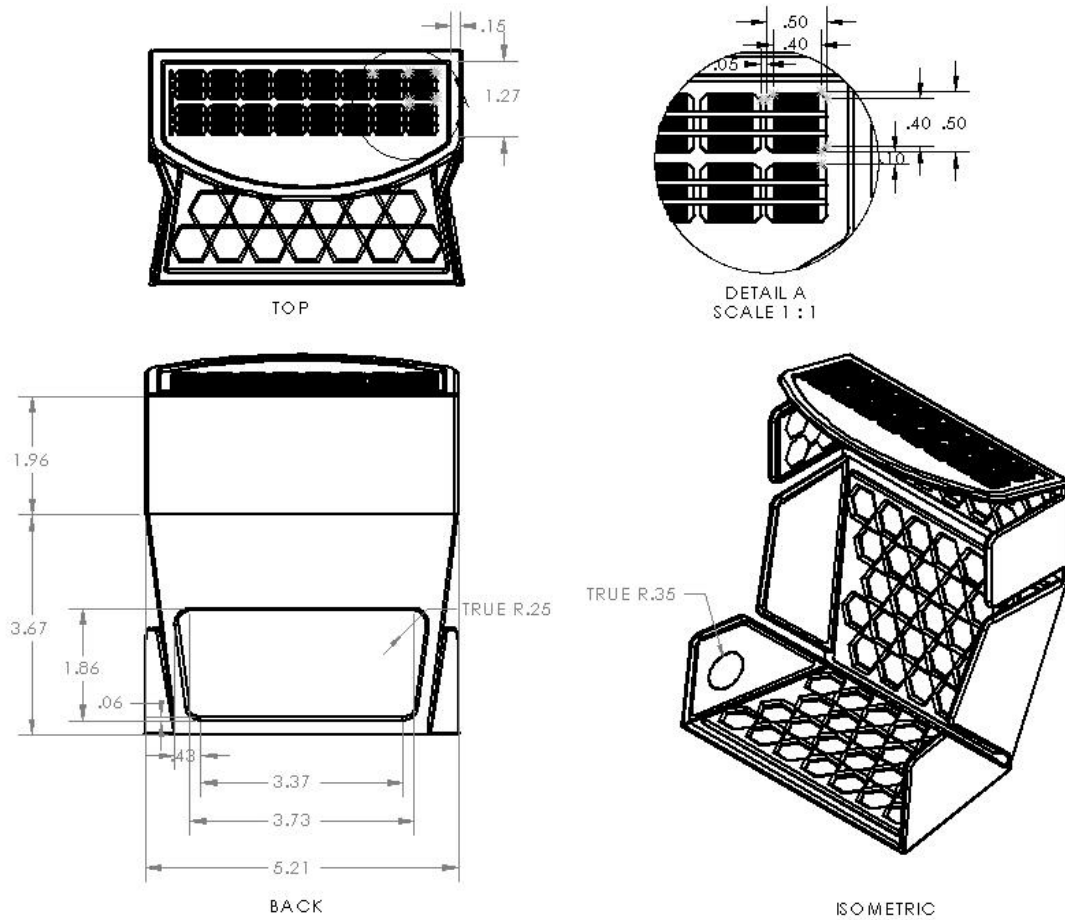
Technical drawing of Back, Top, Isometric and Detail A
